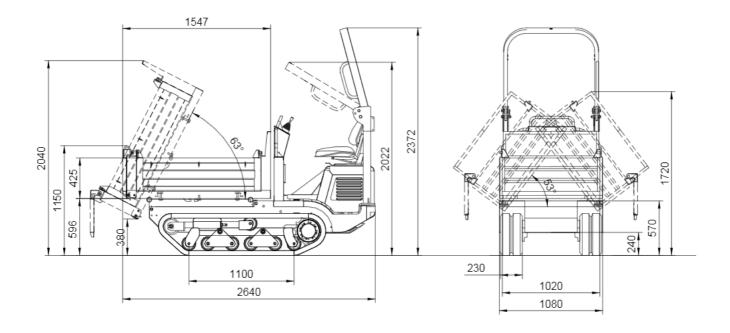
Machine dimensions (model DT15 with 3-way skip)
